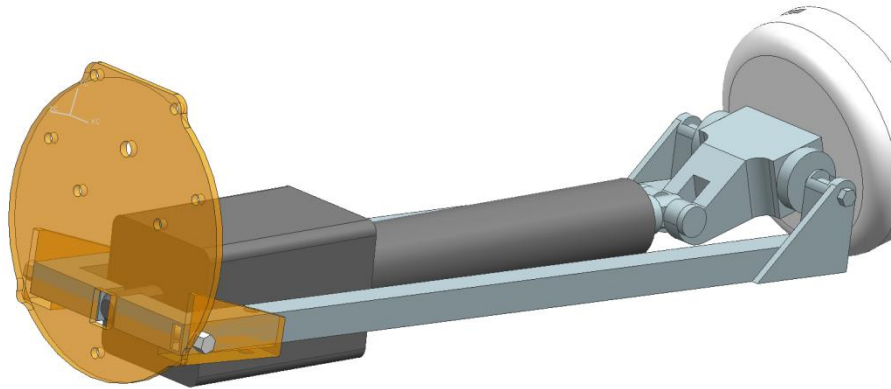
The upper arm attachment plate secures the elbow actuator as well as attaches the lower arm to the shoulder.
